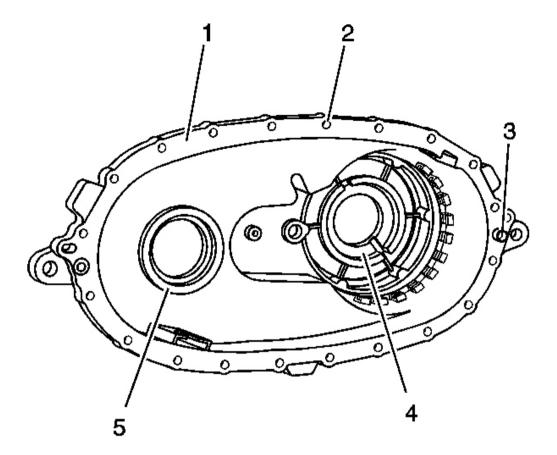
View Of Front Case Inspection Areas Courtesy of GENERAL MOTORS CORP.
